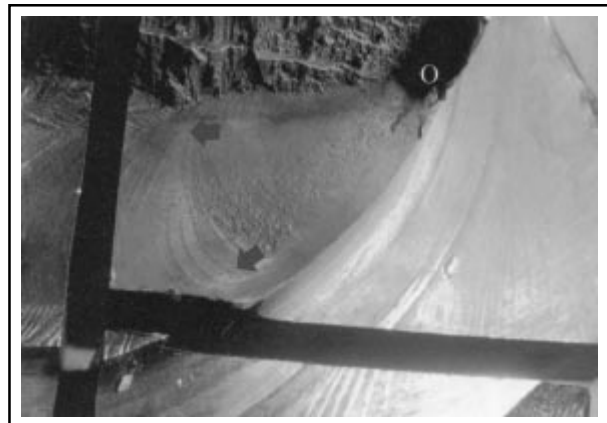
Diagonal/circumferential fatigue fracture adjacent to the woody textured fracture
